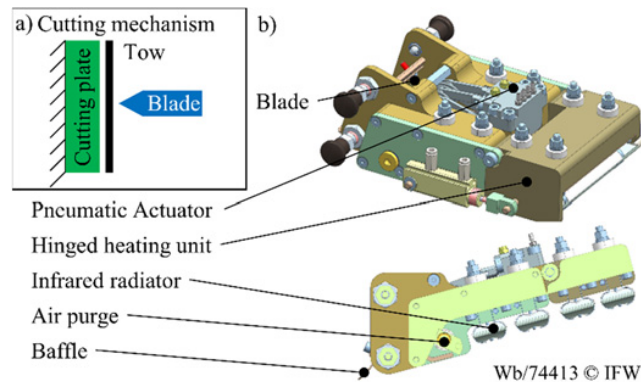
(a) Cutting mechanism of the cutting process, (b) Design of the cutting unit with integrated infrared radiators.
